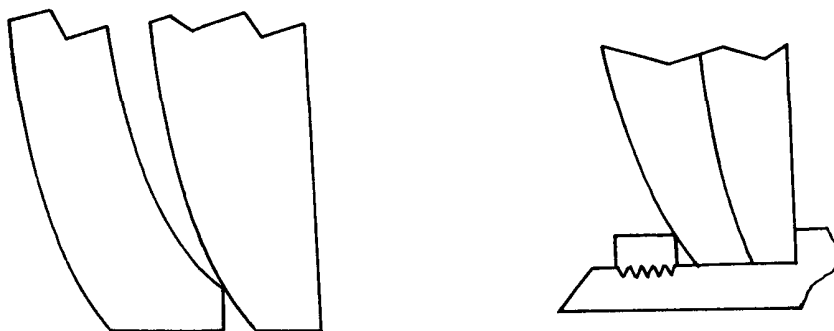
EXAMPLE OF MOUNTING TECHNIQUE THAT RESULTS IN "FRETTING"
